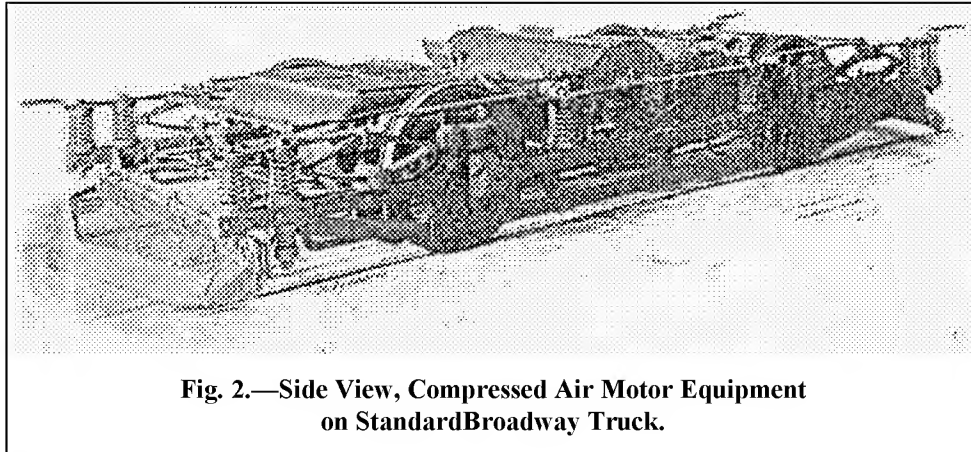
Side View, Compressed Air Motor Equipment on Standard Broadway Truck.
